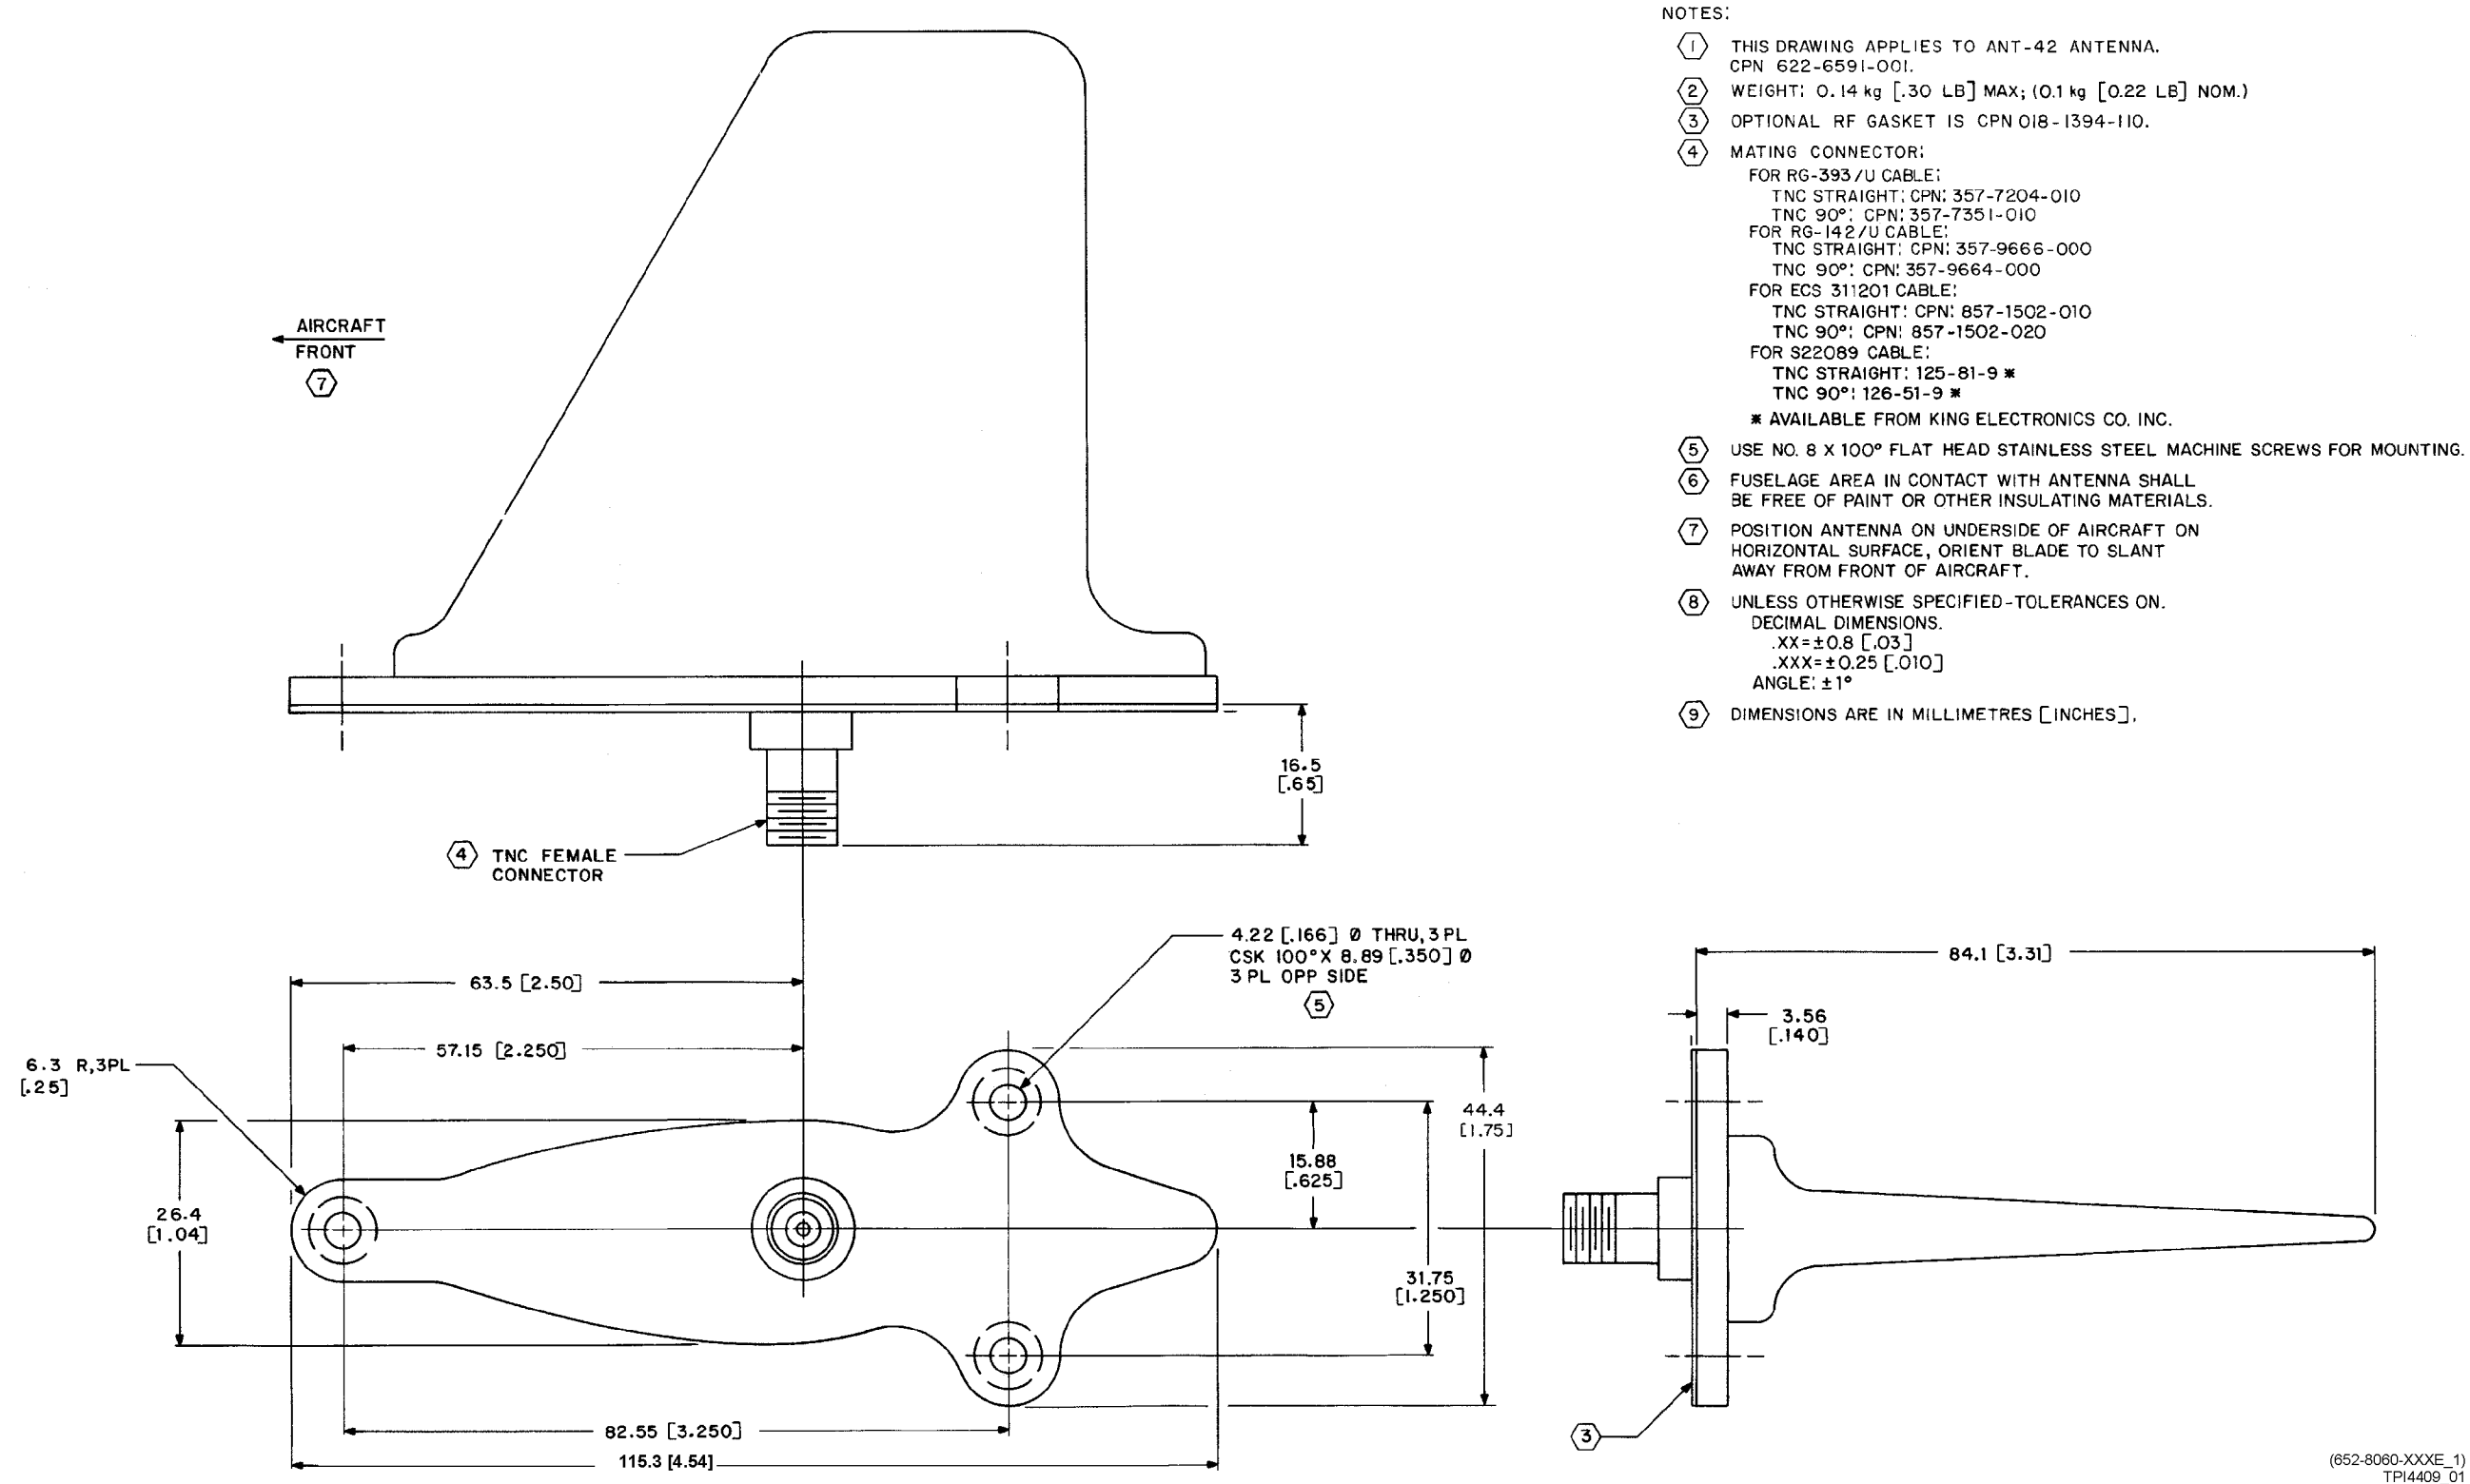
ANT-42 L-Band Antenna, Outline and Mounting Dimensions
